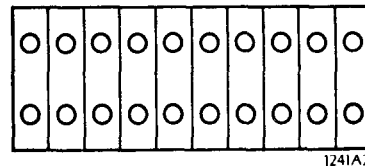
Cross section of pancake coil using flat bar aluminum conductor
